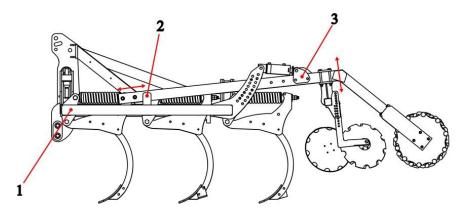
Adjusting the depth and working distance of the roller (1 - cultivator frame, 2 - roller arm attachment screw, 3 - actuator attachment to roller arm)
